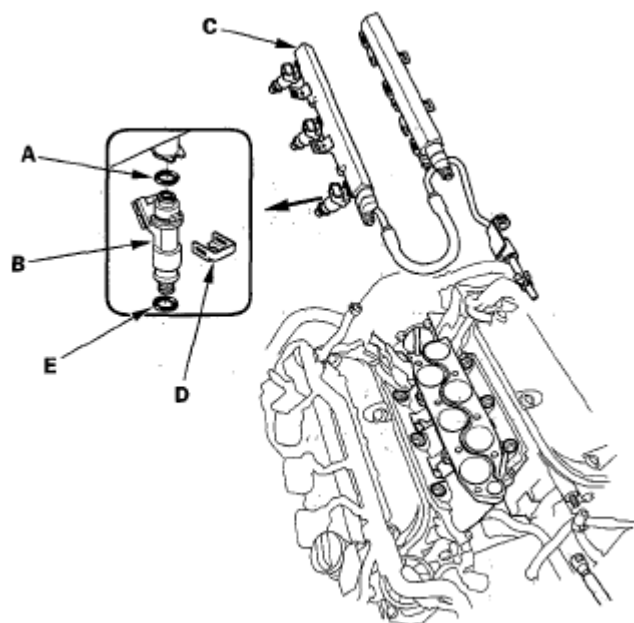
Identifying Injectors To Fuel Rails And O-Ring With Clean Engine Oil
